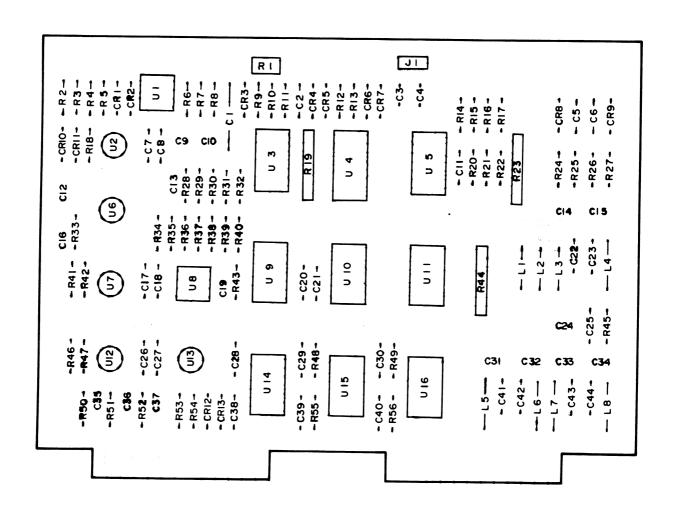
Al3 Detector Board Assembly Component Locations.
